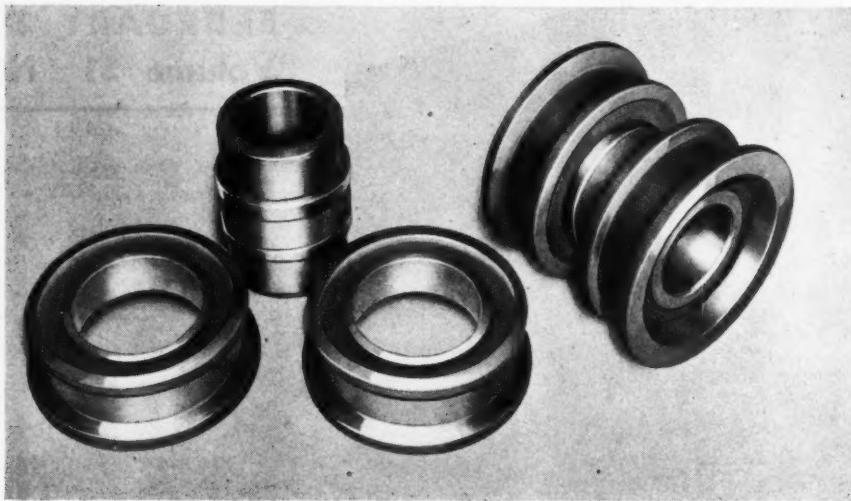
(Left) The Two Rollers and Hub that Make up the Bulldozer Tractor Track Rollers. (Right) An Assembled Track Roller
